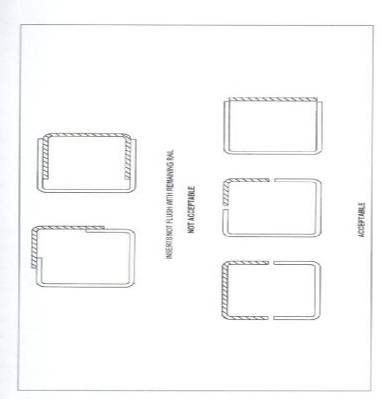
/Cross sections of top rail inserts (before welding)
